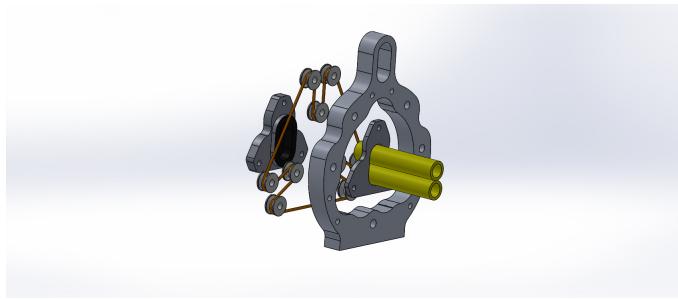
Exploded view of the Kevlar suspension (SolidWorks Model)
